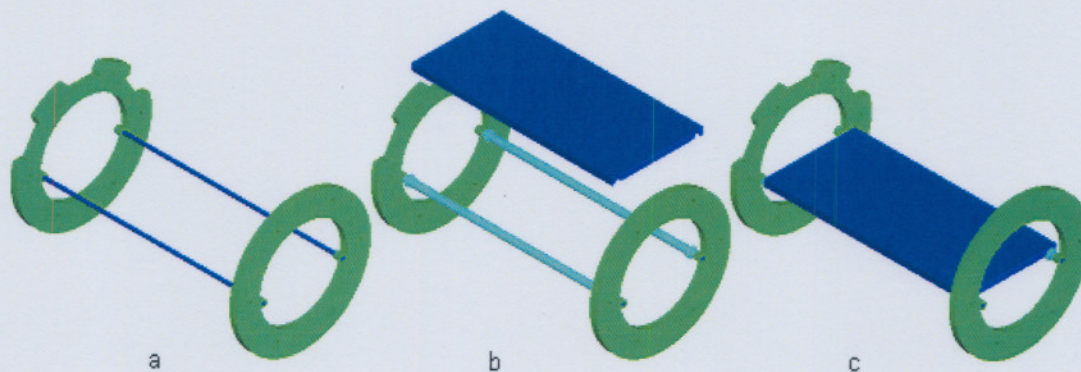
Heater platform assembly (Appendix 7: drawing group INST_HEA_PLAT)
